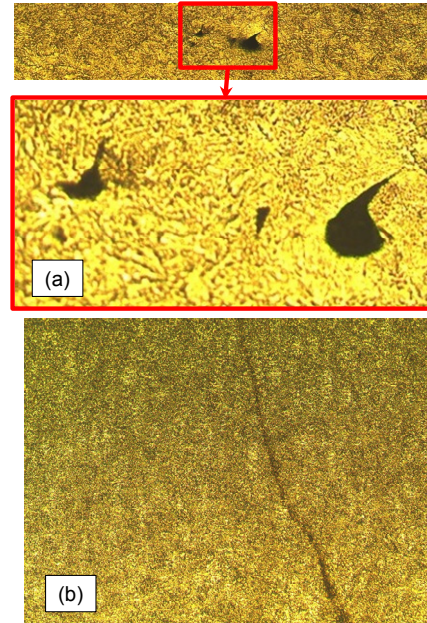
(a) Example of a void; (b) transverse crack detected at specimen head
